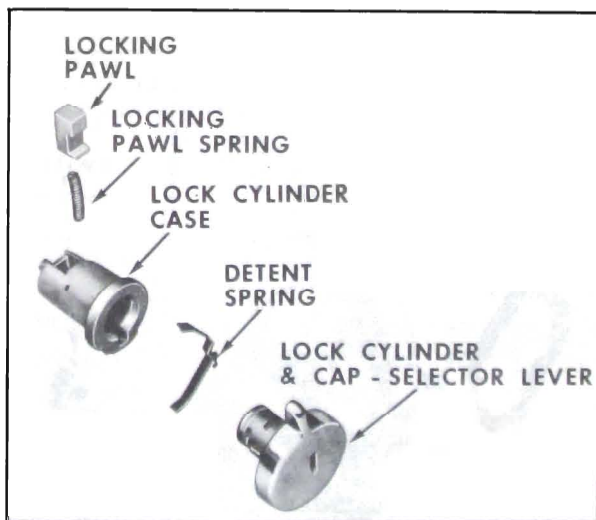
Disassembly of Outside Handle Lock Cylinder and Case
